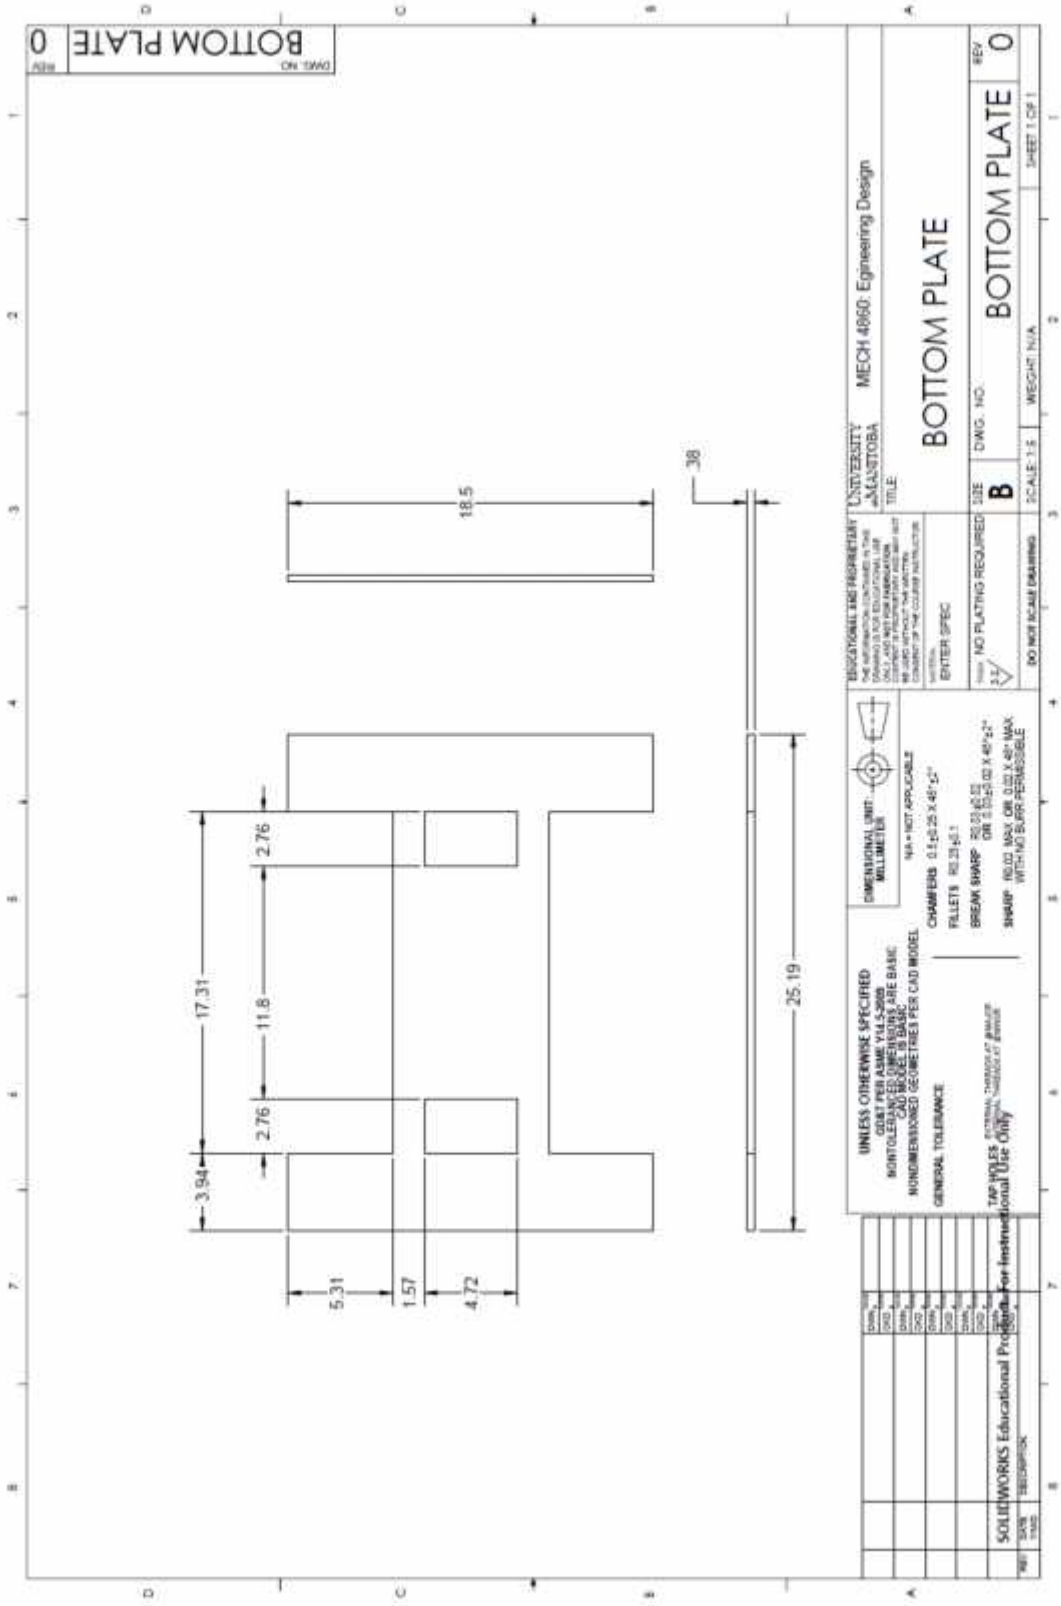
Technical drawing for the bottom plate [5] used with permission.
